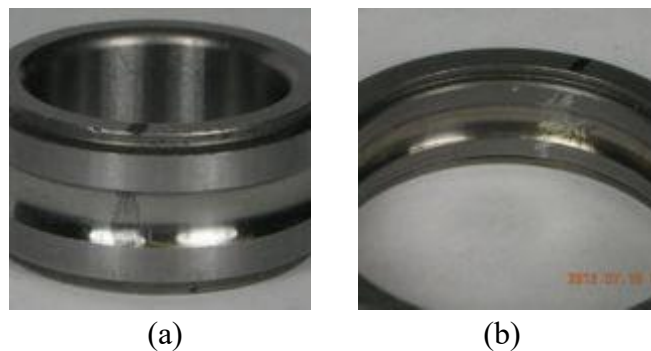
defective bearings: (a) Inner race defect (b) Outer race defect.
